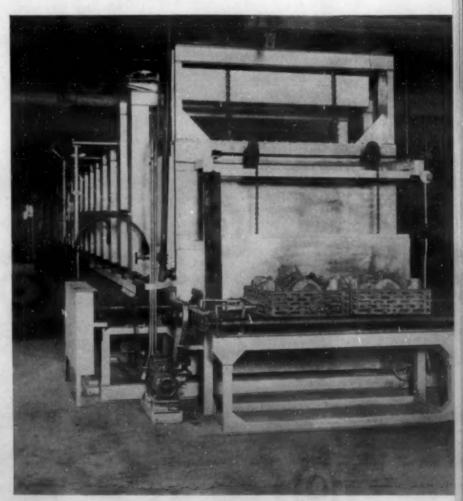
Charging End of Two Continuous Pusher Roller Rail Conveyor Type Electric Malleableizing Furnaces.
